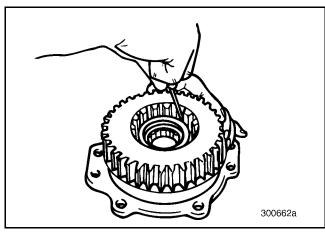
Installing Main Drive Pinion Gear and Spiral Snap Ring
